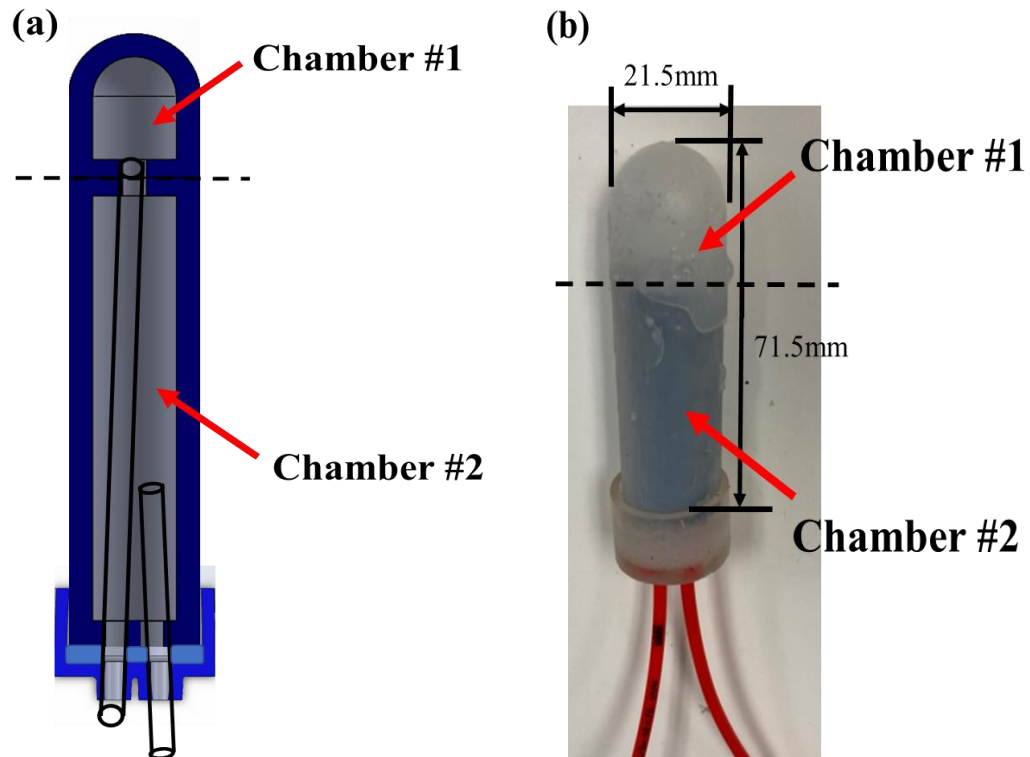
(a) Schematic of a dual chamber dilator and (b) an improved design of dual chamber dilator
